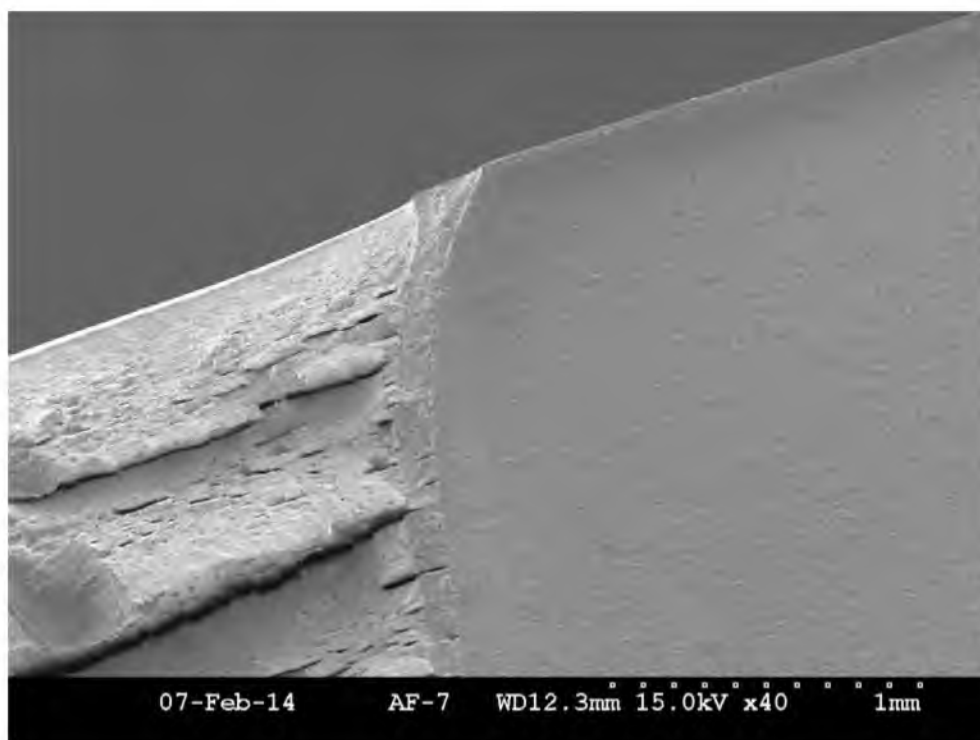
GT270-28 40x End of Fatigue Crack Image
